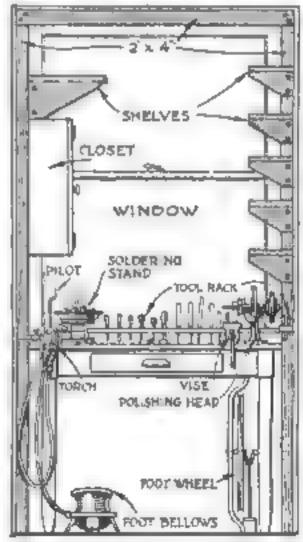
The main workbench with vise solder ing stand, polishing head, and tool racin.
